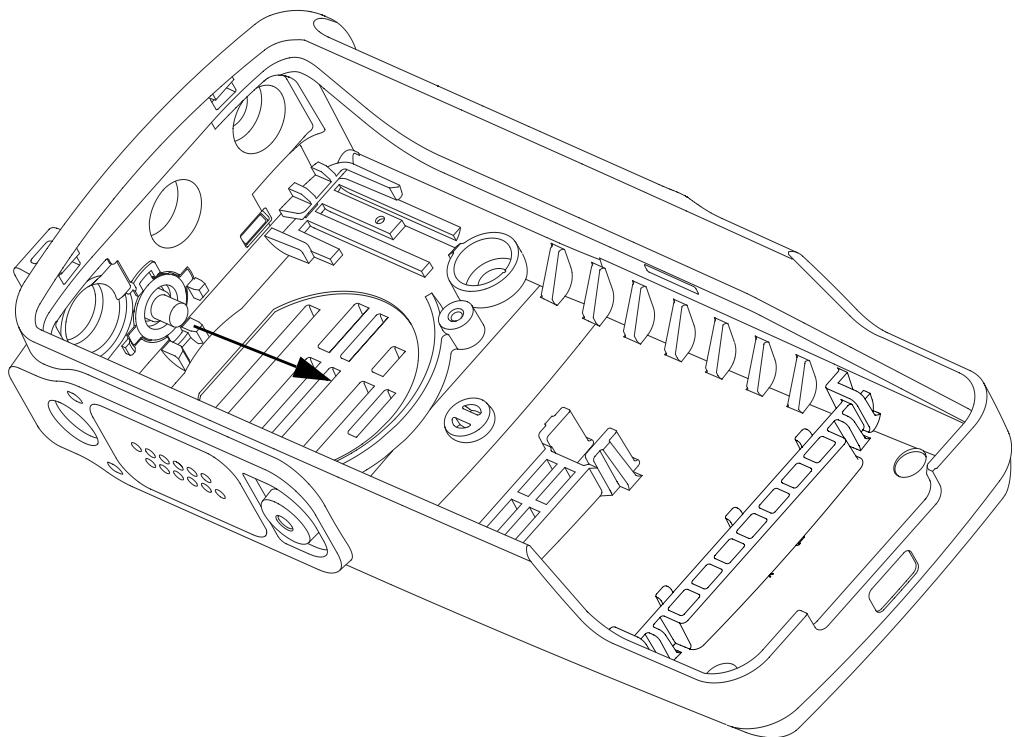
Emergency Button disassembly for Non Keypad Model
